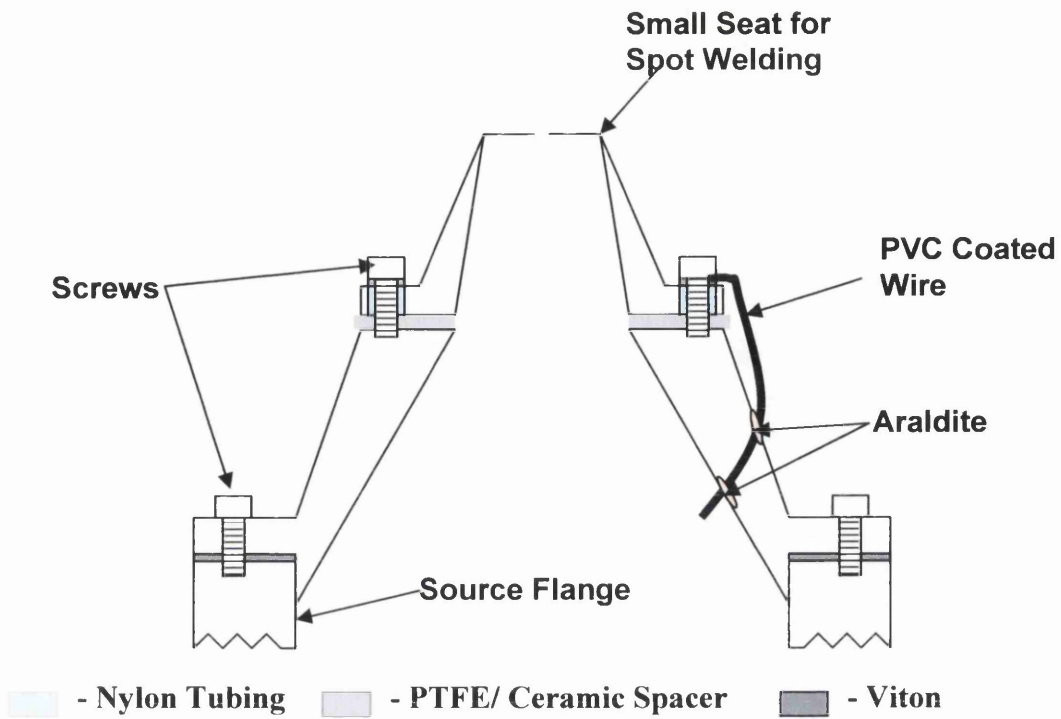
Prototype two-piece cone design (approximately 1:2)
